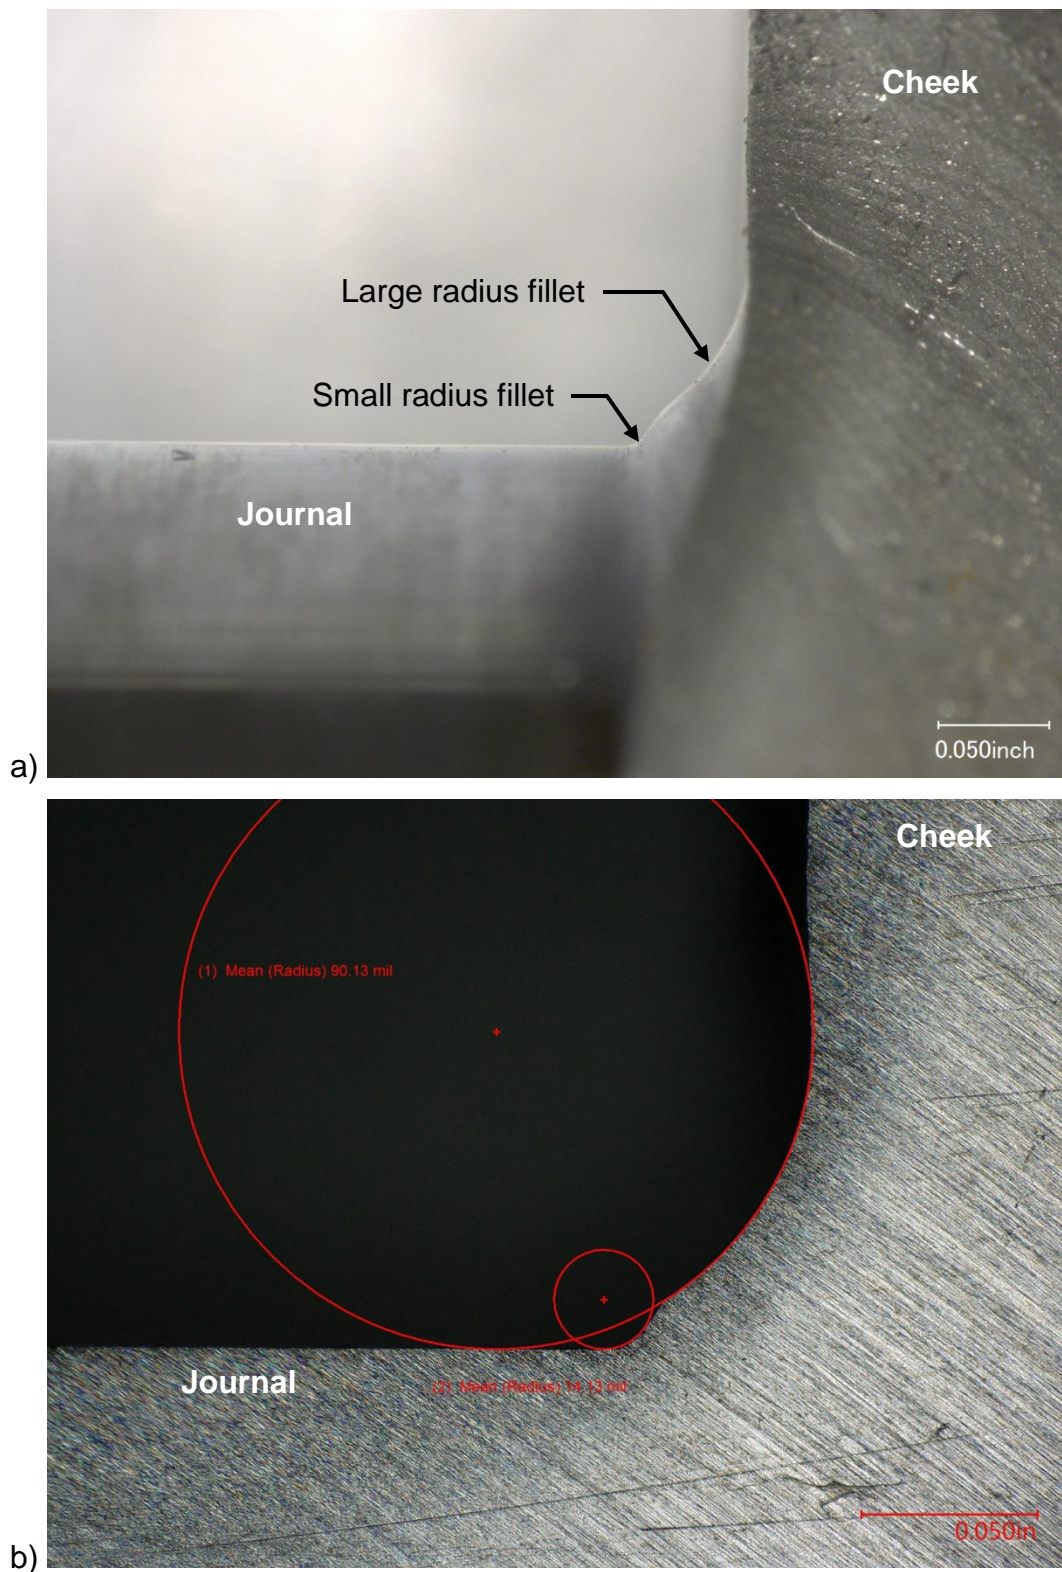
a) Image of the journal to cheek fillet at the forward edge of the number 2 main bearing journal; b) Section through the journal used to measure the size of the large and small radii.
